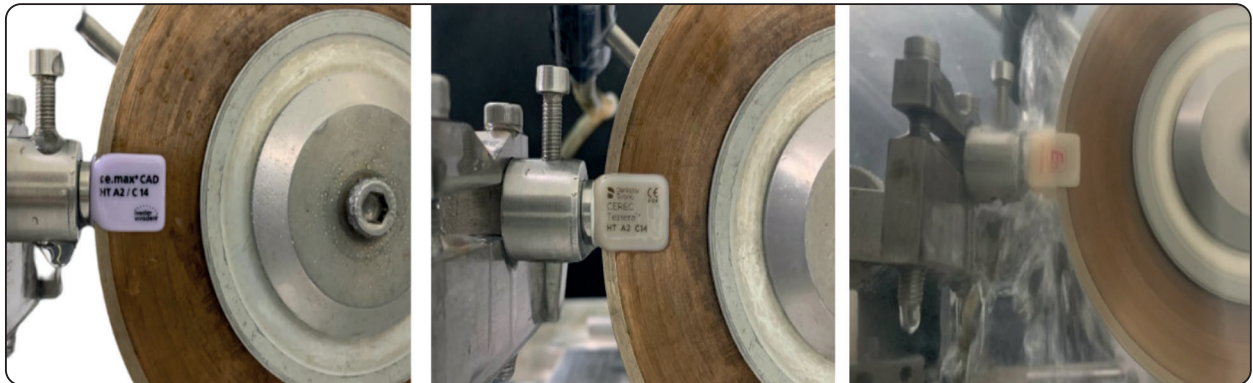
Steps of cutting ceramics blocks by IsoMet Machine.
